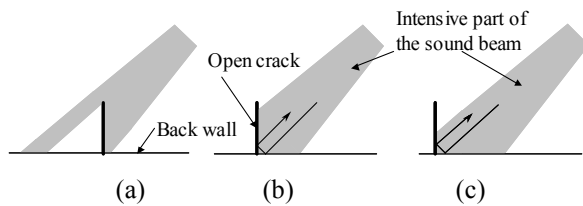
Ultrasonic angle beam against the open crack, where the beam center line strikes at (a) left of the crack corner, (b) crack corner and (c) right of the crack corner (schematic presentation)
